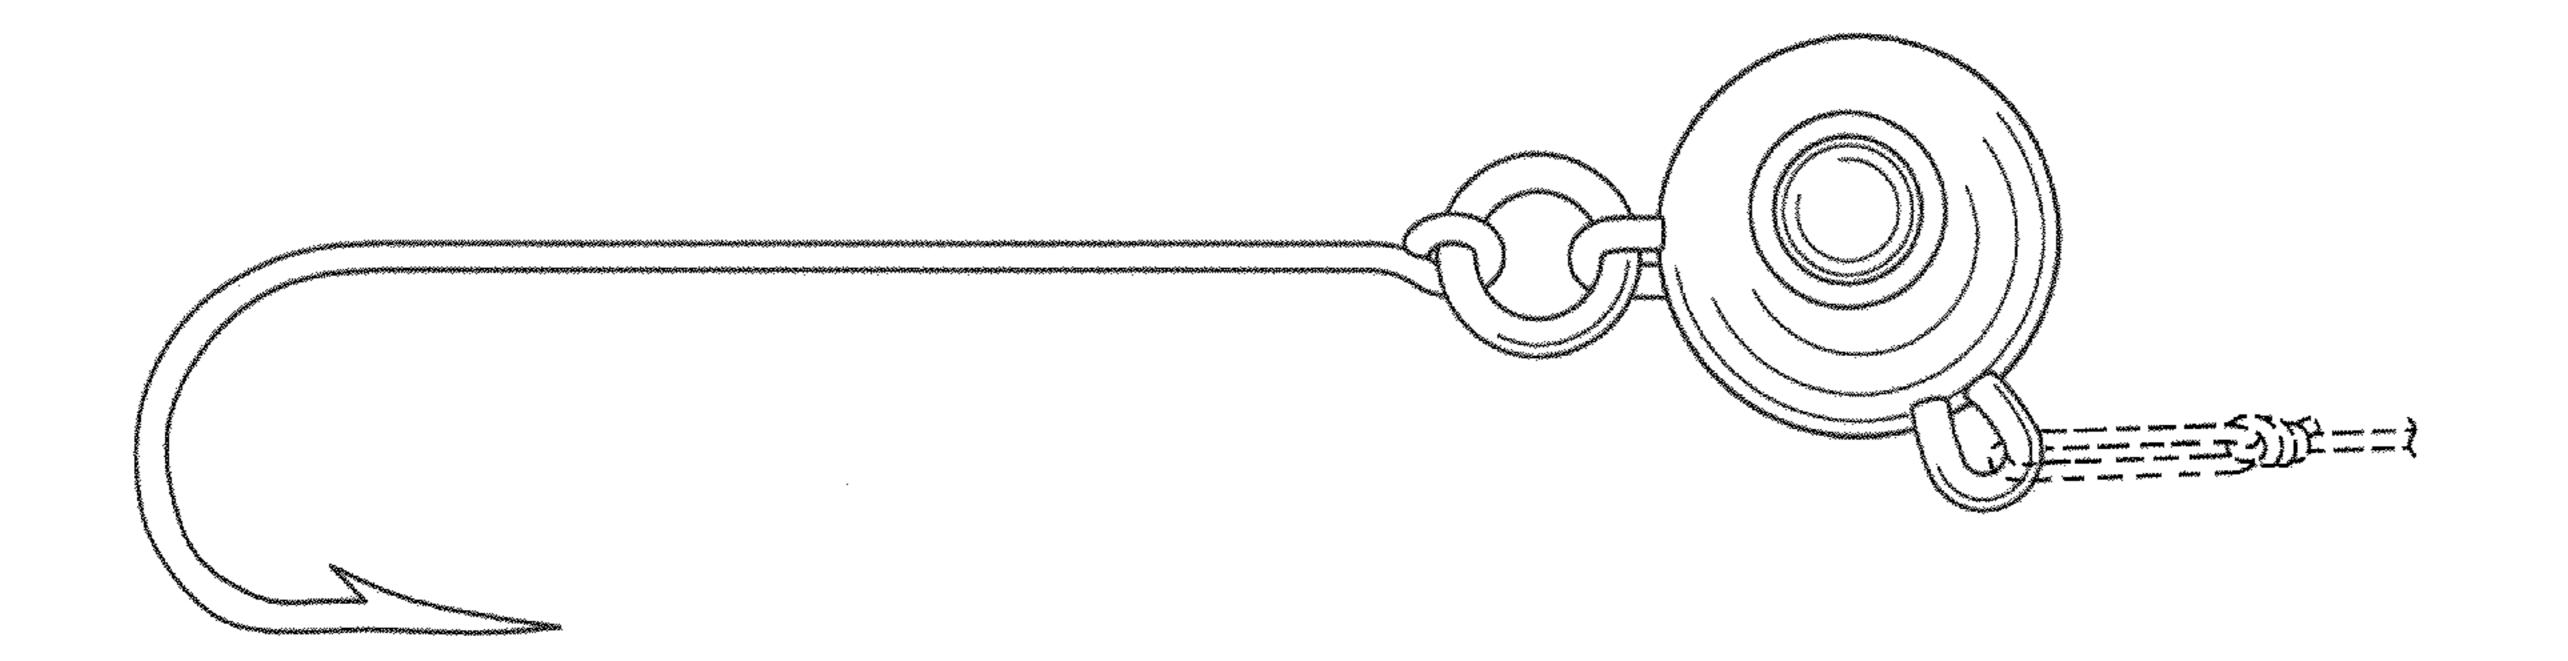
is a perspective view of a jig fishing lure, with a barbed hook and jighead connected with a swivel and ring assembly;
